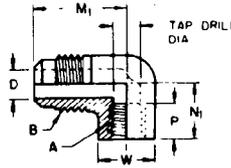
90 DEG INTERNAL PIPE THREAD REDUCING ELBOW (010203) (E3)
